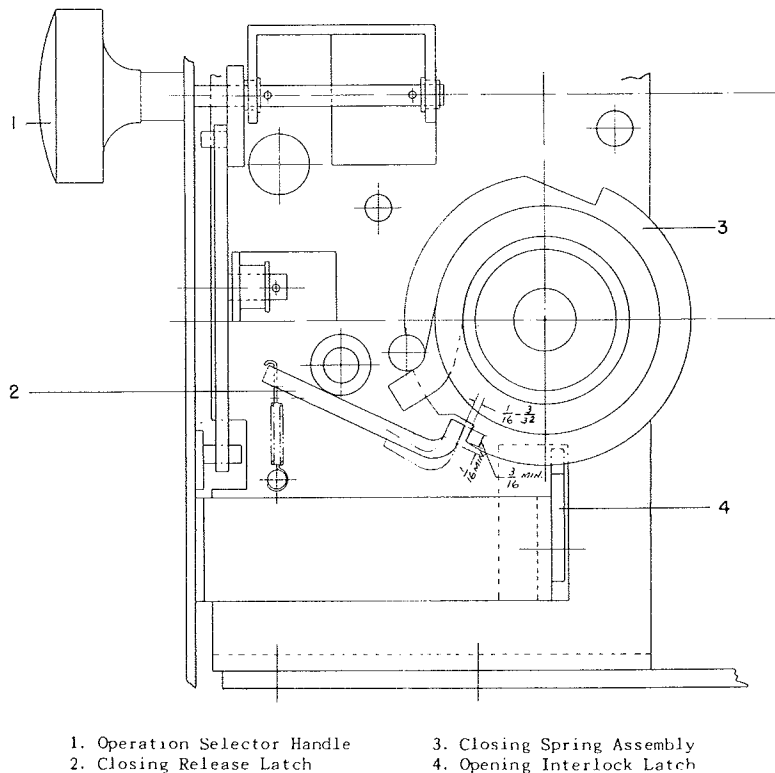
Partial Cross Section of Operating Mechanism Shown in Open Position
